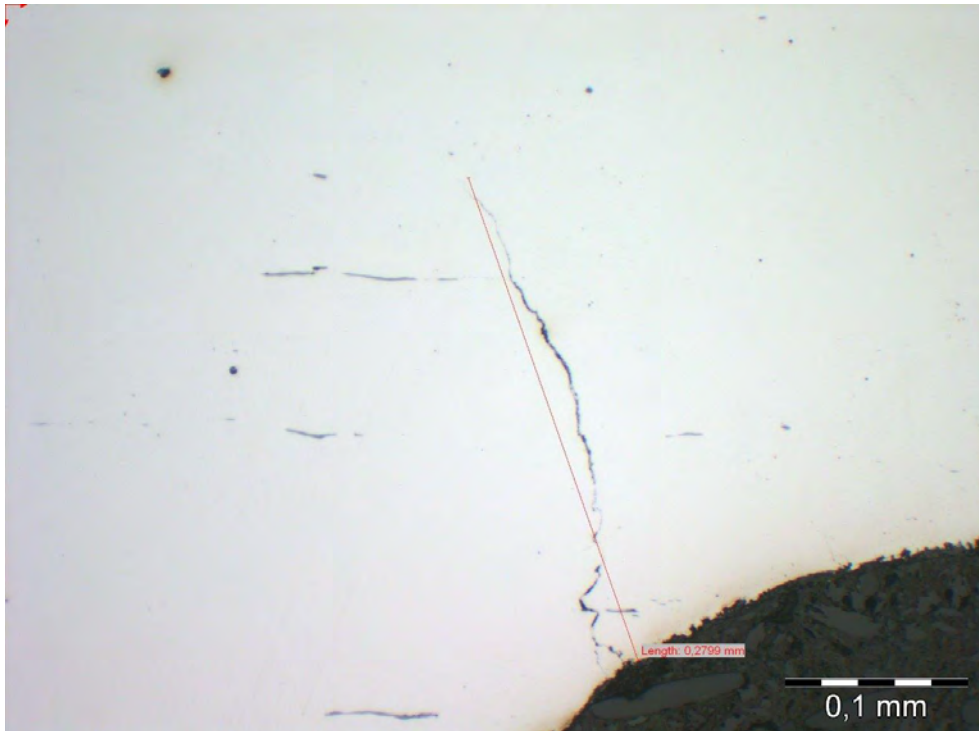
Crack at segment A, second ridge on barrel no. SFK 0123-A
